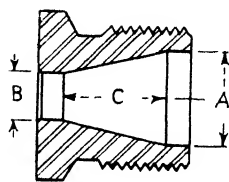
This part is easier to produce than that in Fig. 10, because the large end of the taper is outward and not back of a shoulder. The amount of taper is indicated in this case by giving the diameters A and B at each end thereof and by indicating the length C .
